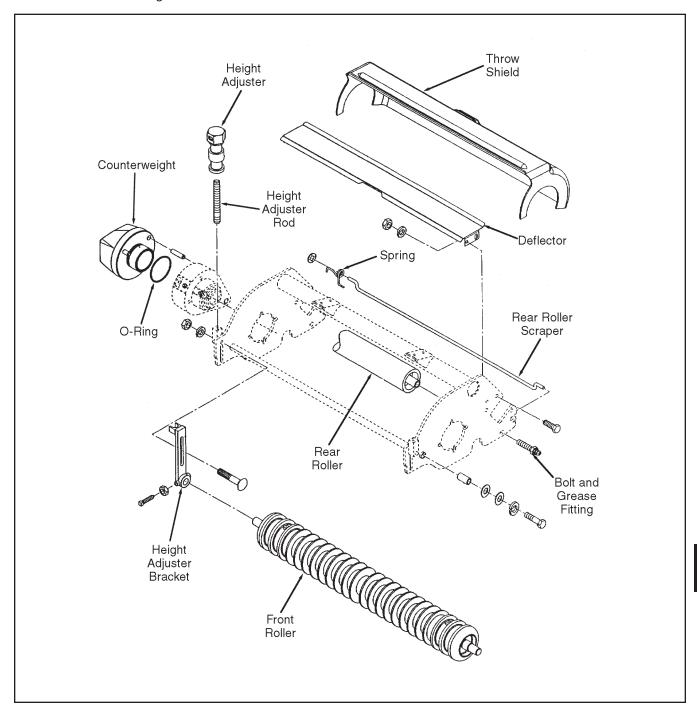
F-4. Mower Unit Disassembly (Sheet 1 of 2)
